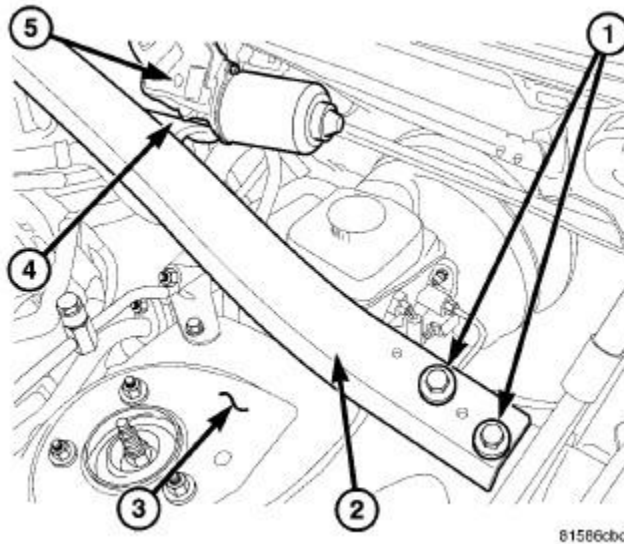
Bolts, Strut Support, Driver Side Strut Tower, Bracket & Wiper Motor
